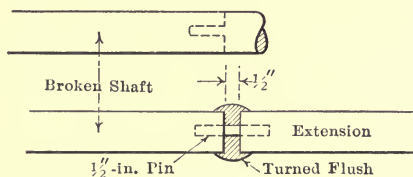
WELDING A BROKEN SHAFT.
